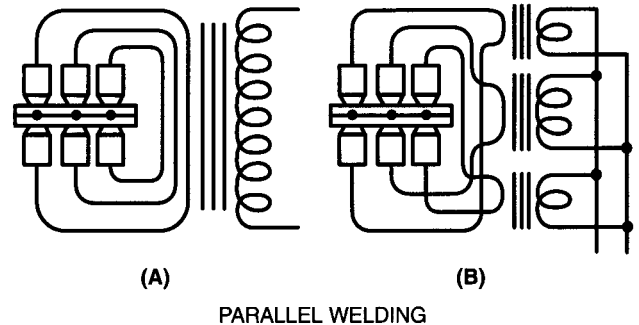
Typical Arrangements for Multiple Spot Welding
